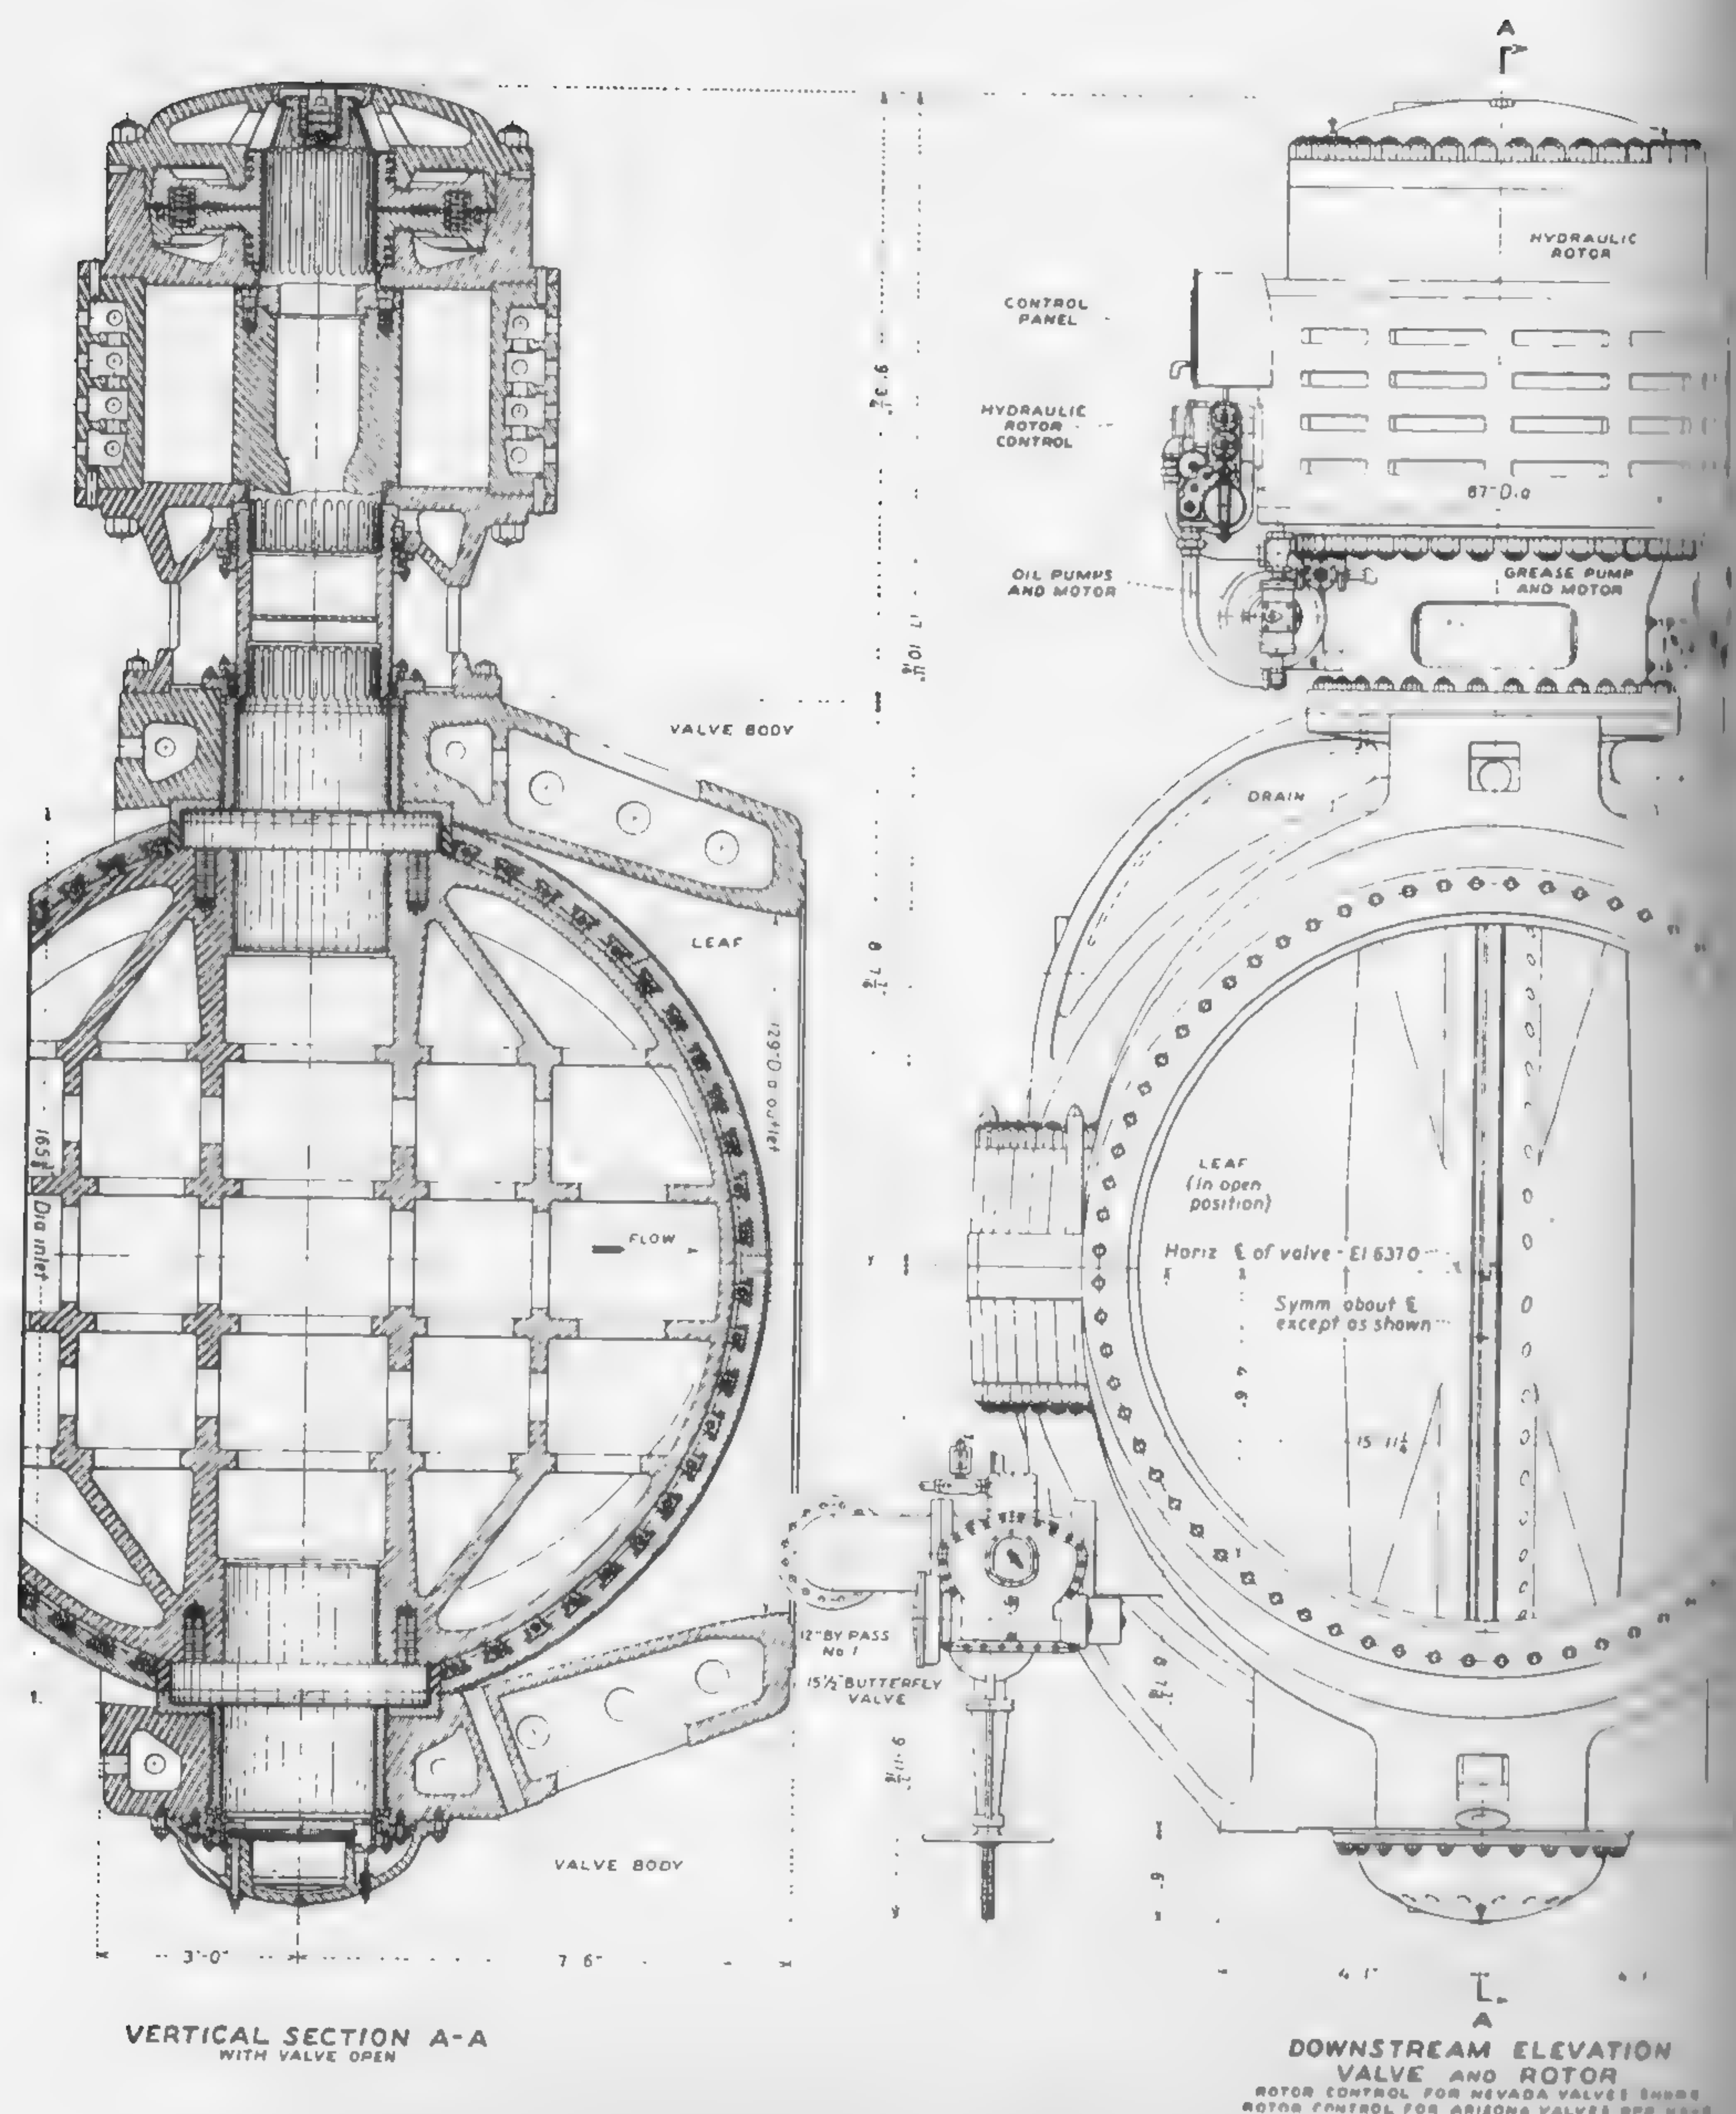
A 168-inch butterfly valve. (Bureau of Reclamation)
